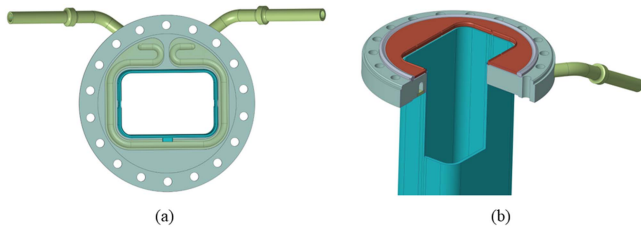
Cooled waveguide flange (a) bottom view with the covering titanium plate semi-transparent showing the cooling channel, inlet, and outlet pipes; (b) cut view of the flange with gasket and waveguide section.
